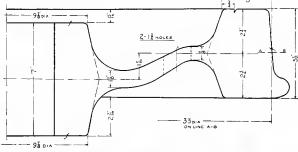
Rolled Steel Wheel, Diameter 33 in.
